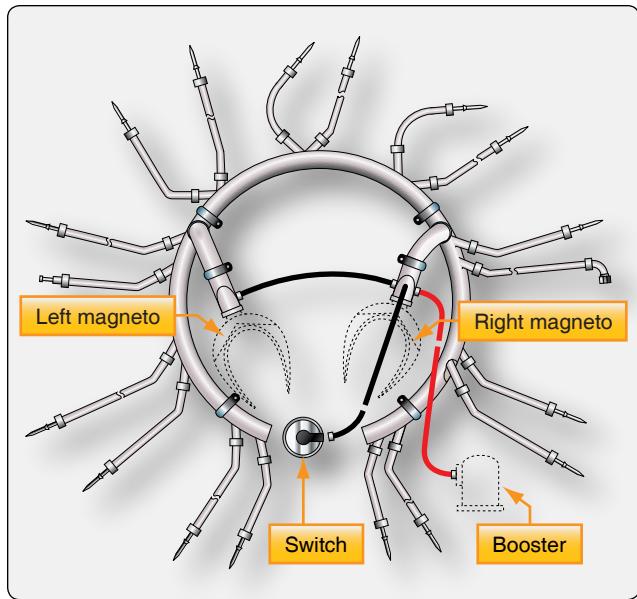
Accessory-mounted nine cylinder engine ignition harness.
